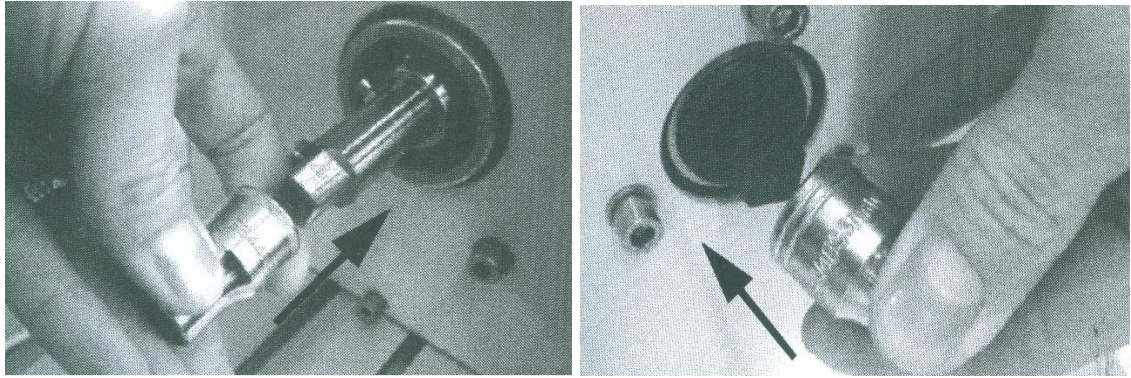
Fit the sockets to the torque head and the gearbox output
